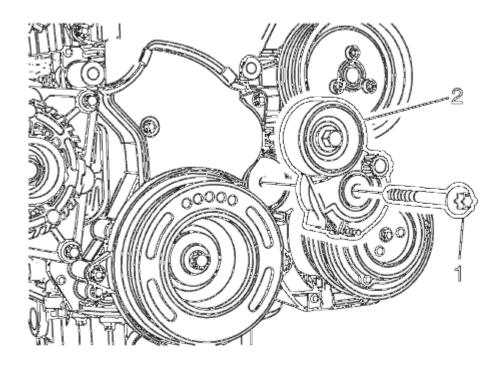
Drive Belt Tensioner Bolt Courtesy of GENERAL MOTORS COMPANY
